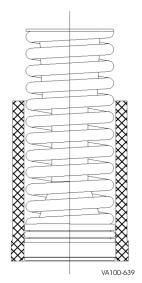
Piston and Spring Assembly Installed in Insertion Sleeve
